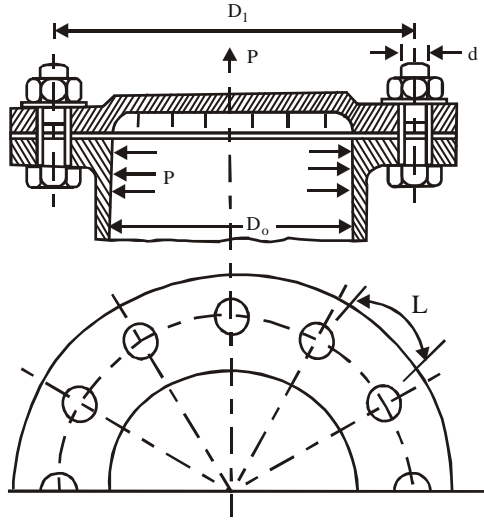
Pressure Vessel Cover and Fastening Bolts
